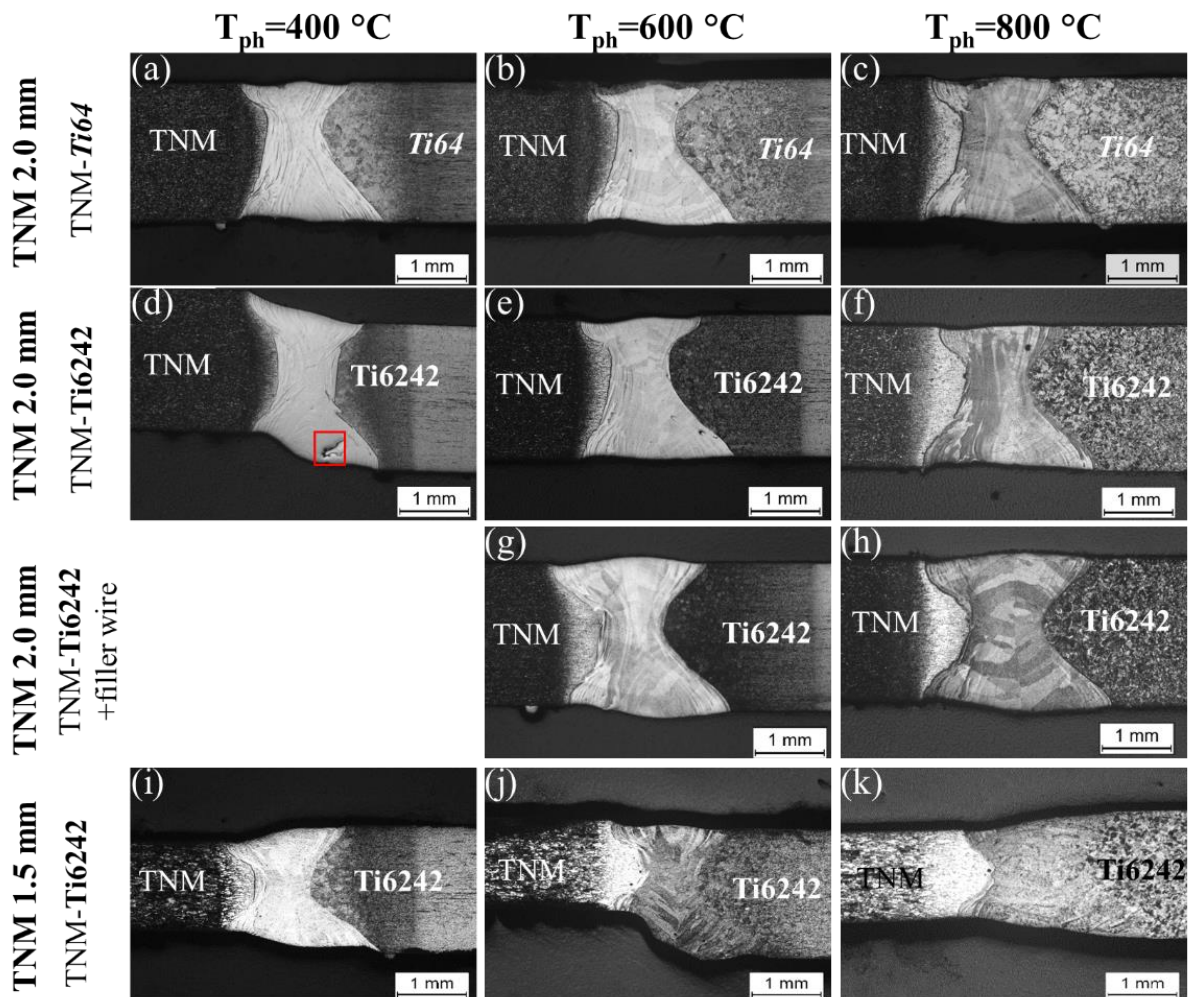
Cross-sections of dissimilar TNM joints with different preheating temperatures, Ti-alloy joining partners and sheet thicknesses welded with $P=4.5$ kW, $v=3$ m/min. Red square indicates position of crack in cross-section.
